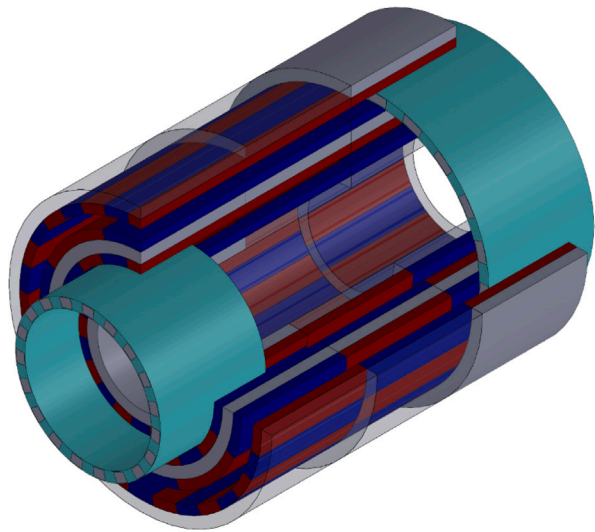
Multi-stage magnetic gearbox solution with two moving carriers.
